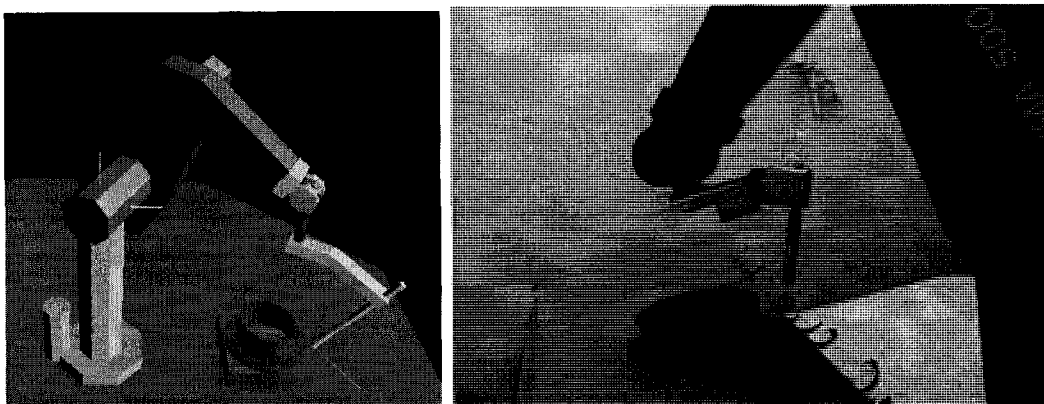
Arc-welding task with the PUMA 500 manipulator
